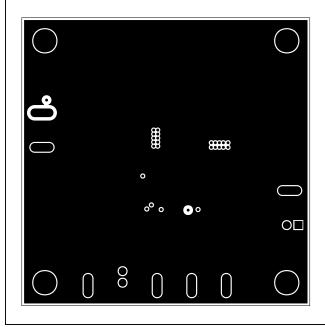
MAX17506 3.3V Output EV Kit PCB Layout—Inner-Layer 1
